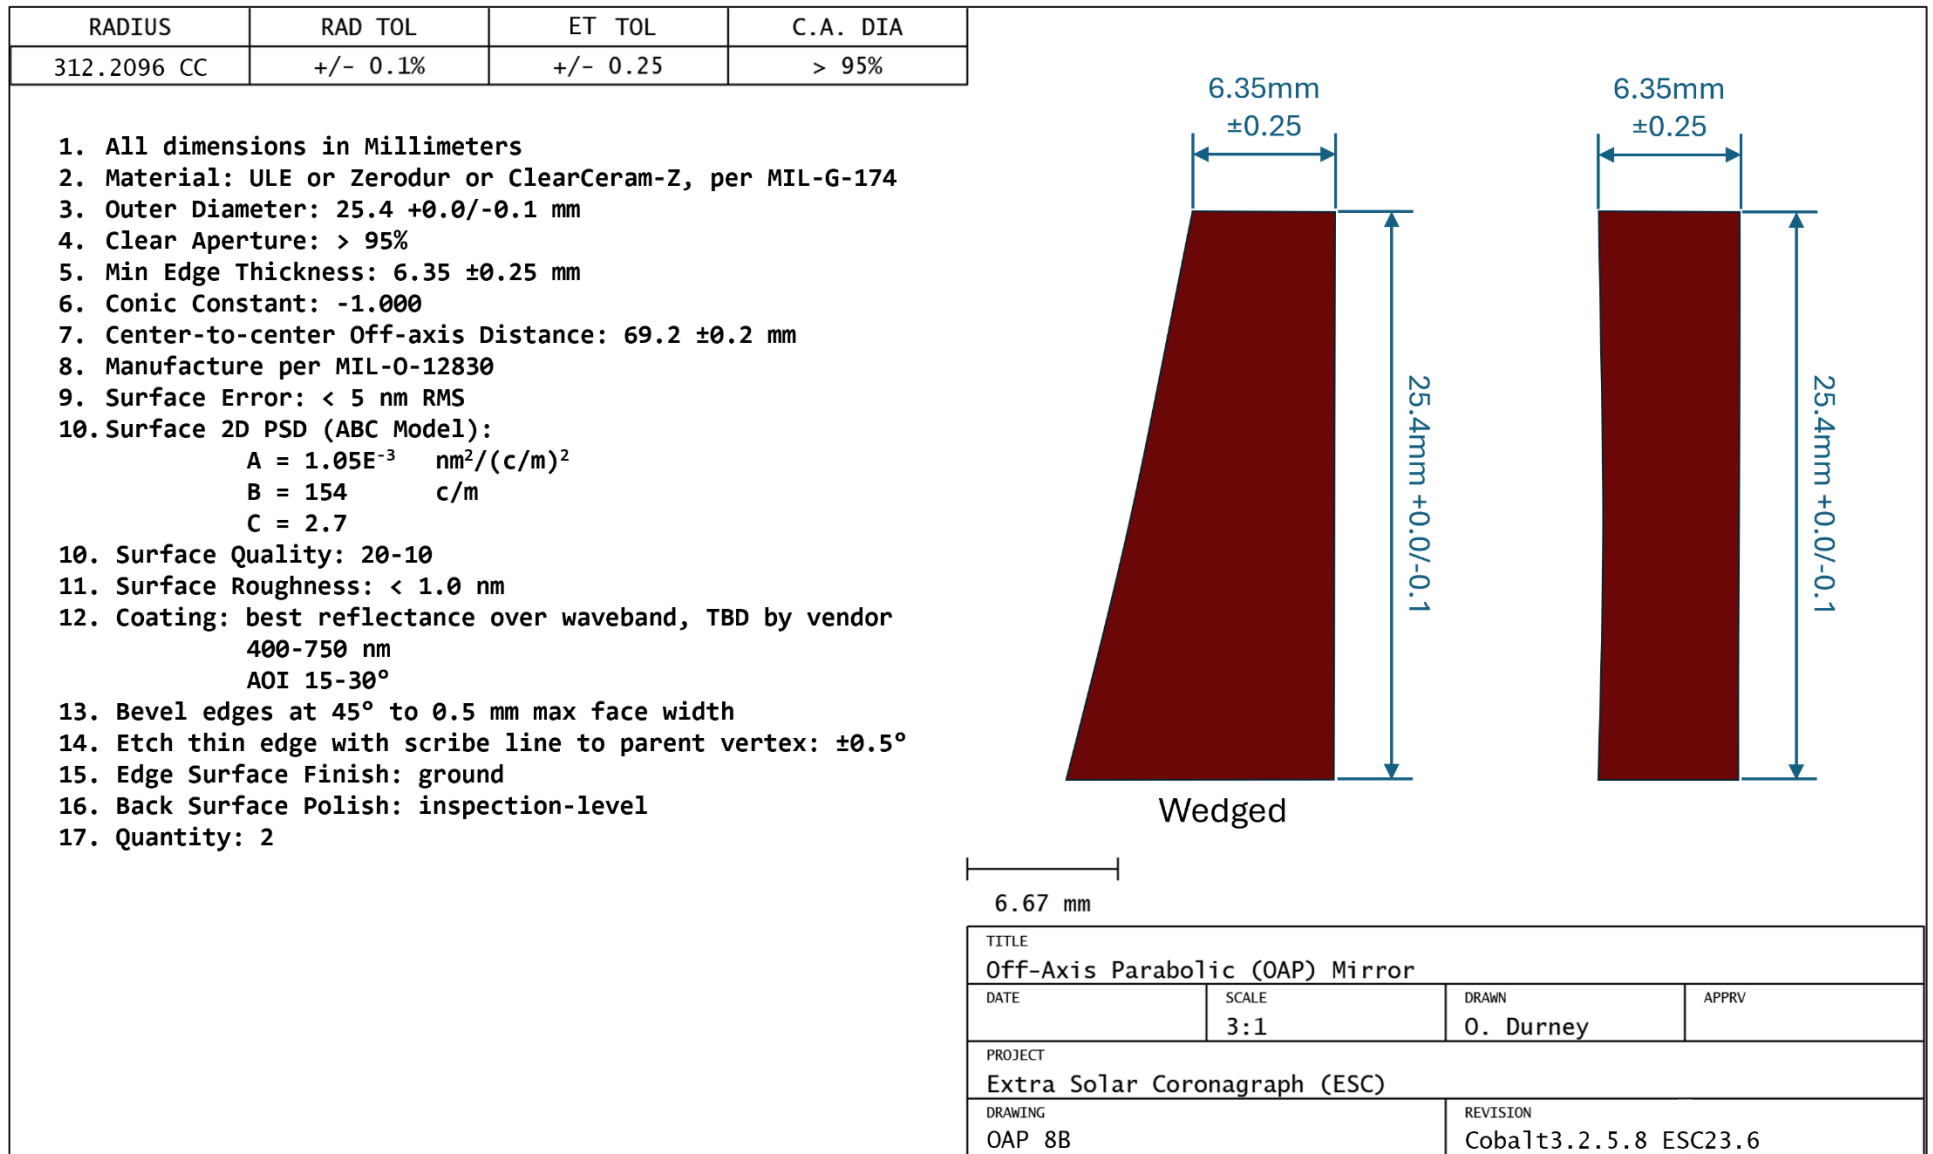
Off-axis parabolic mirror, OAP 8B drawing
